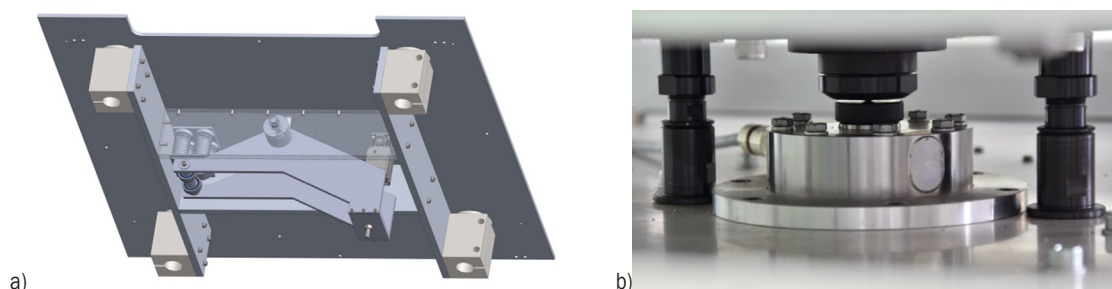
a) Model of the lever relieving the force gauge, and b) measurement of the axial force
